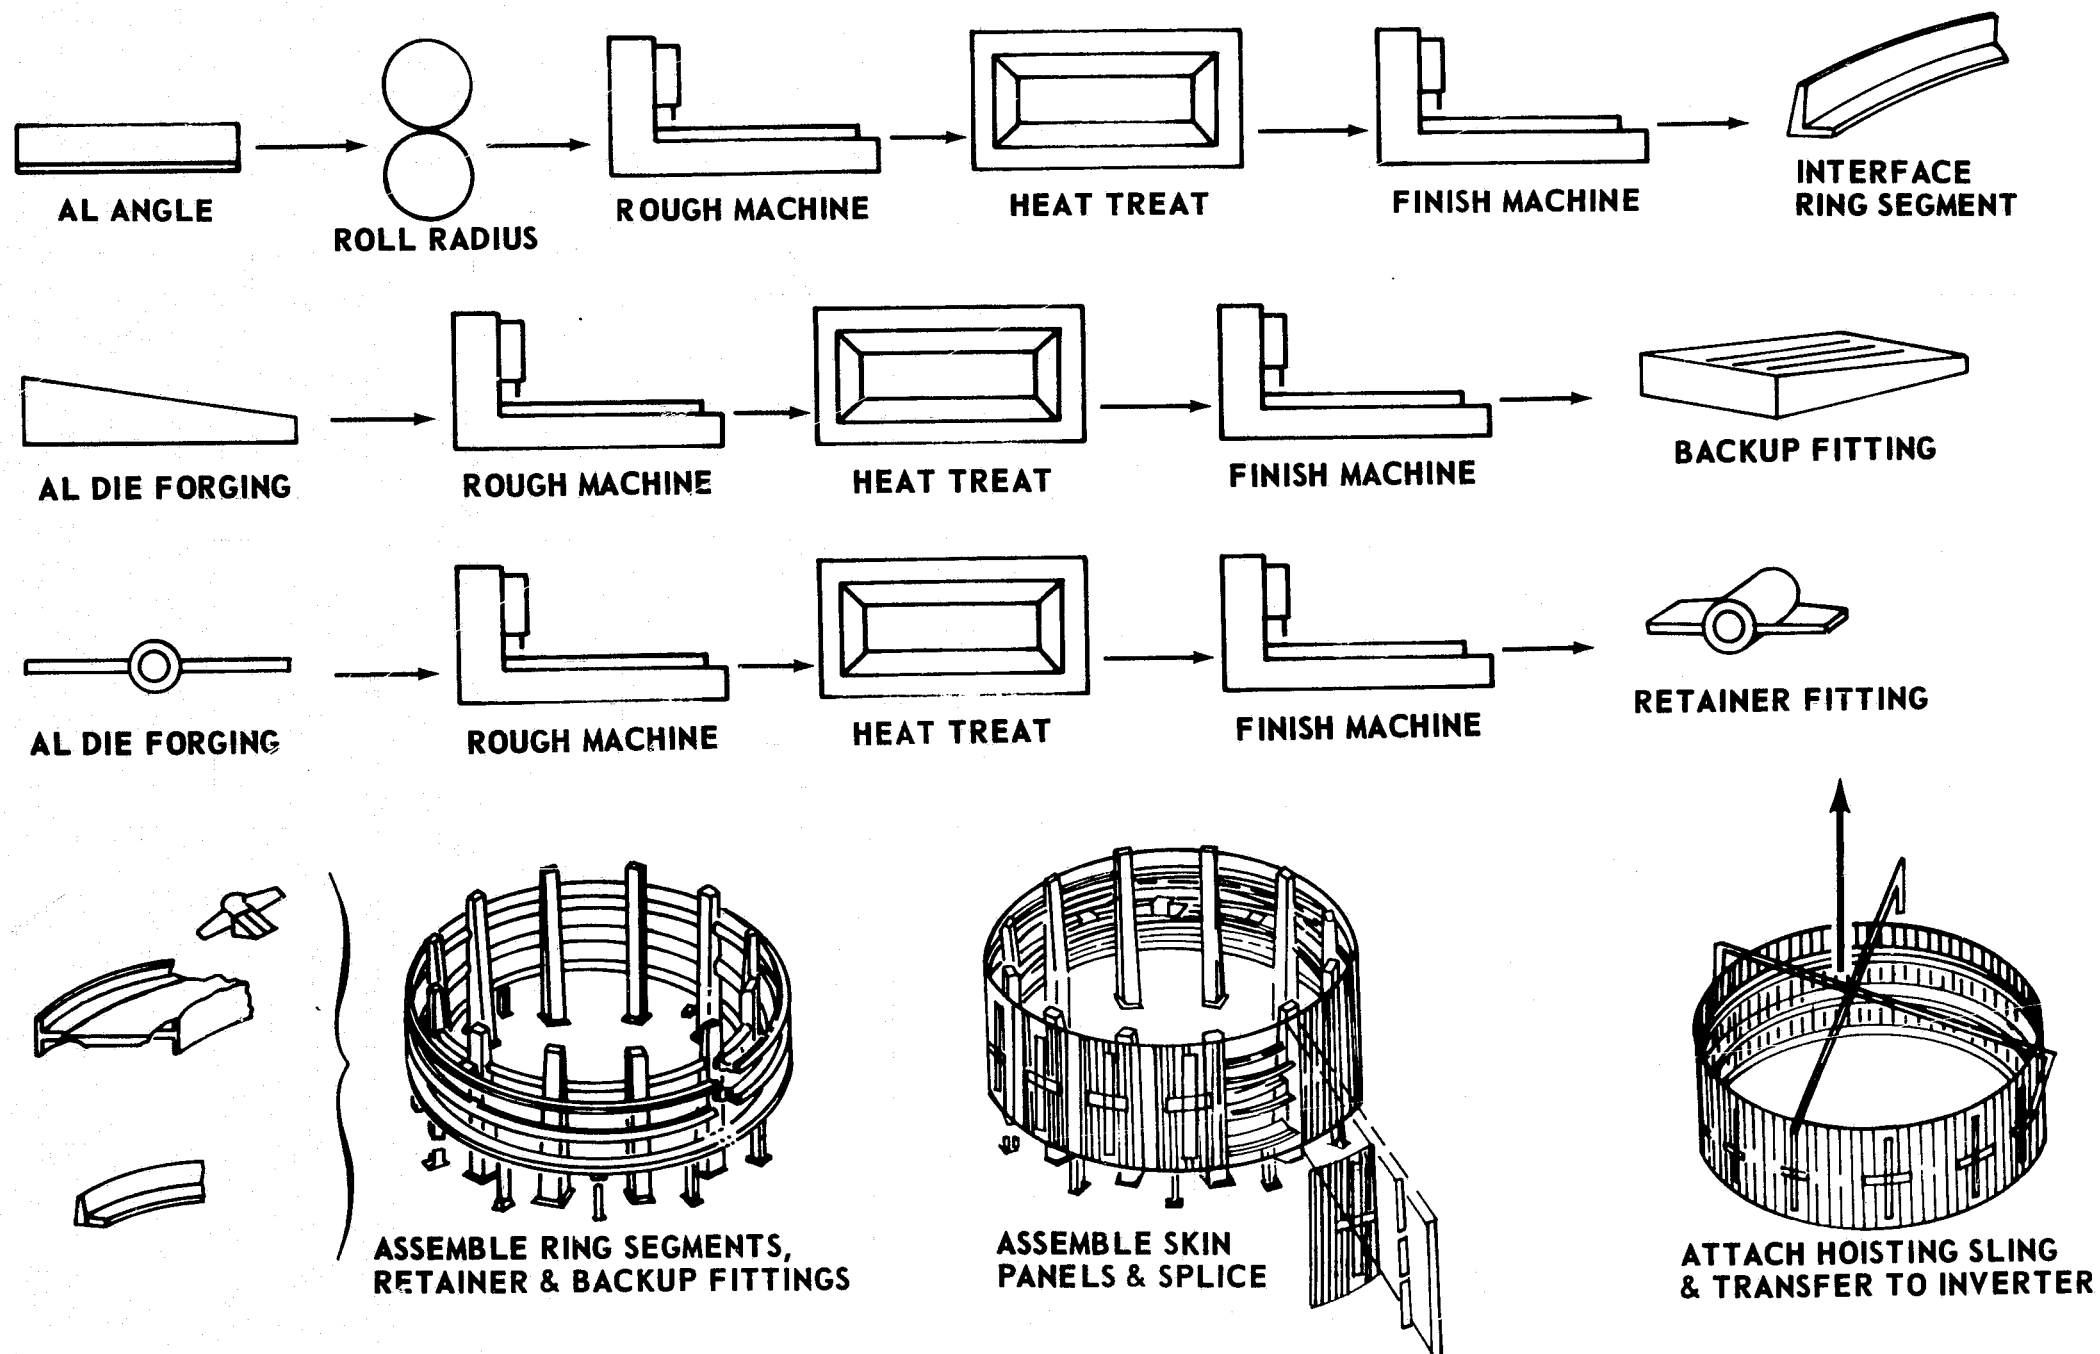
FORWARD SKIRT FINAL ASSEMBLY SEQUENCE
